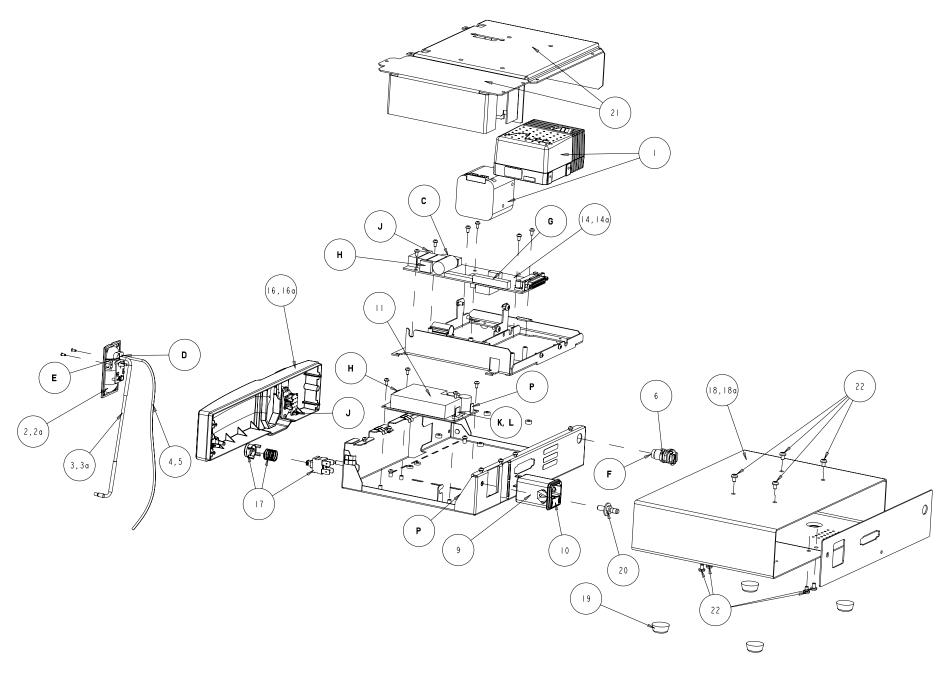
Isometric Drawing Gas Module SE with Spirometry
